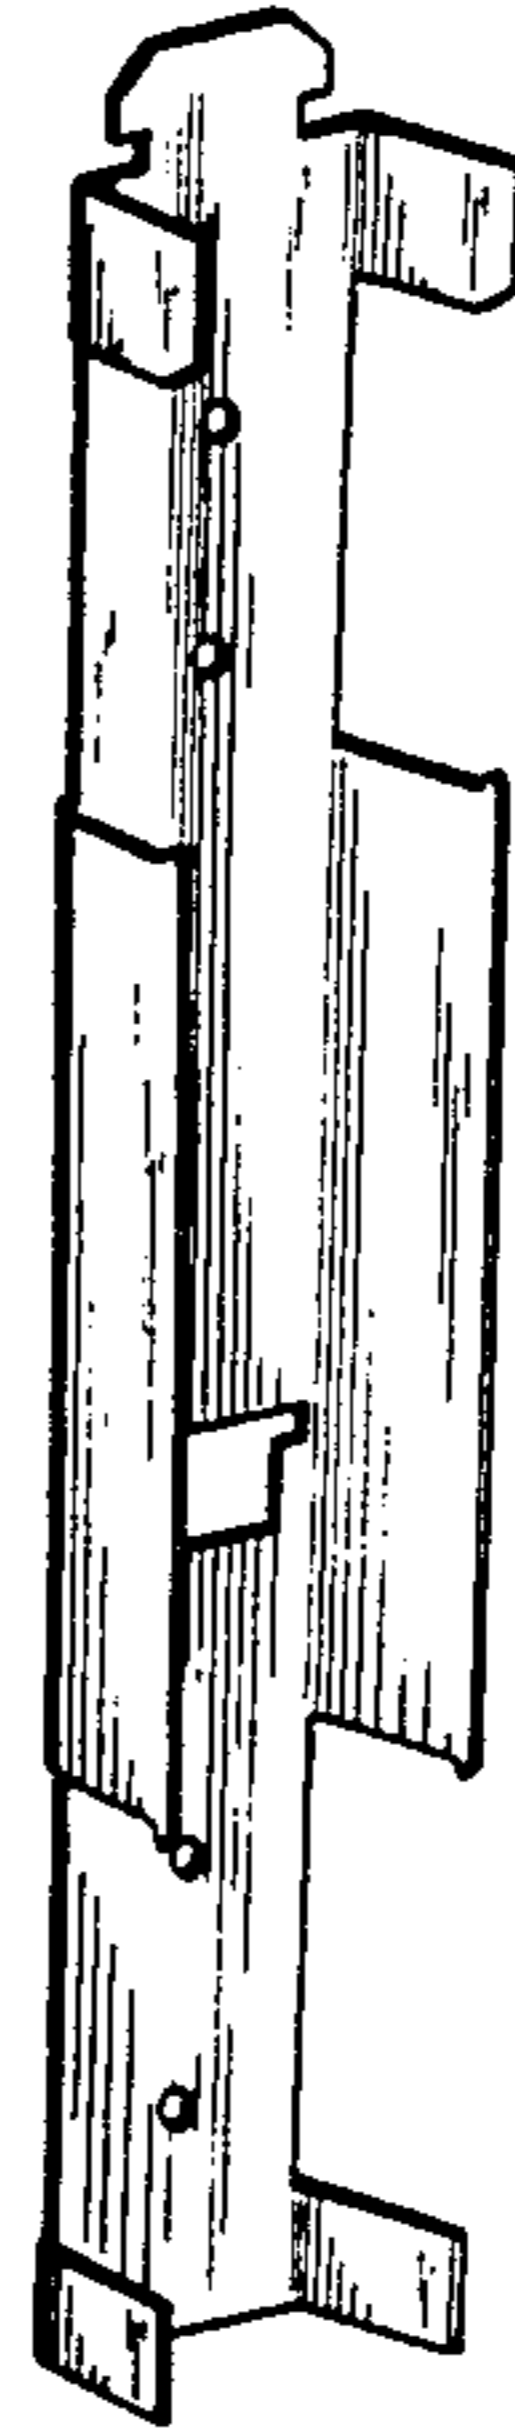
is a right side view thereof, the left side view being a mirror image.
